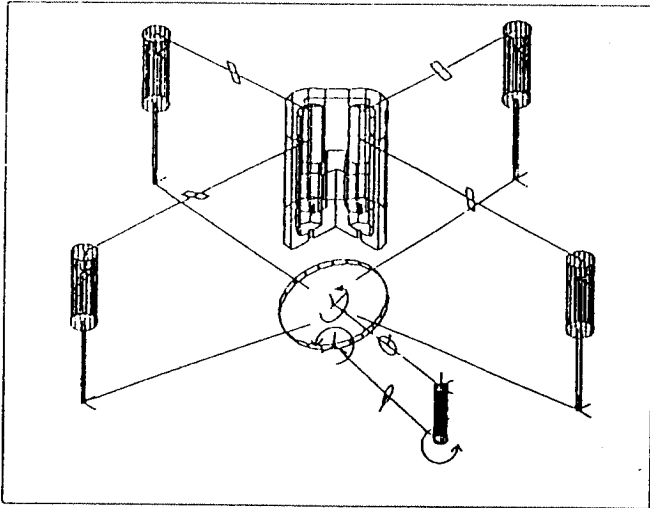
The MECHANISMS model of the Stirling Engine shown in exploded form
